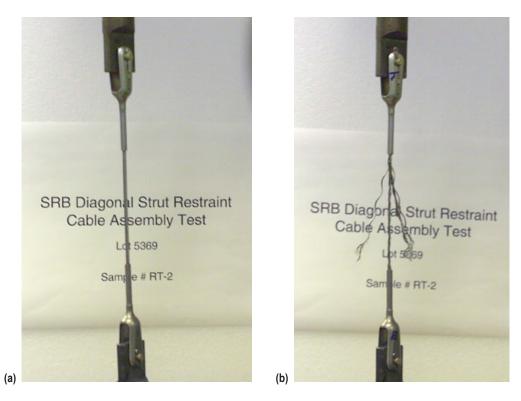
5369–RT–2 (a) before testing and (b) after testing.
